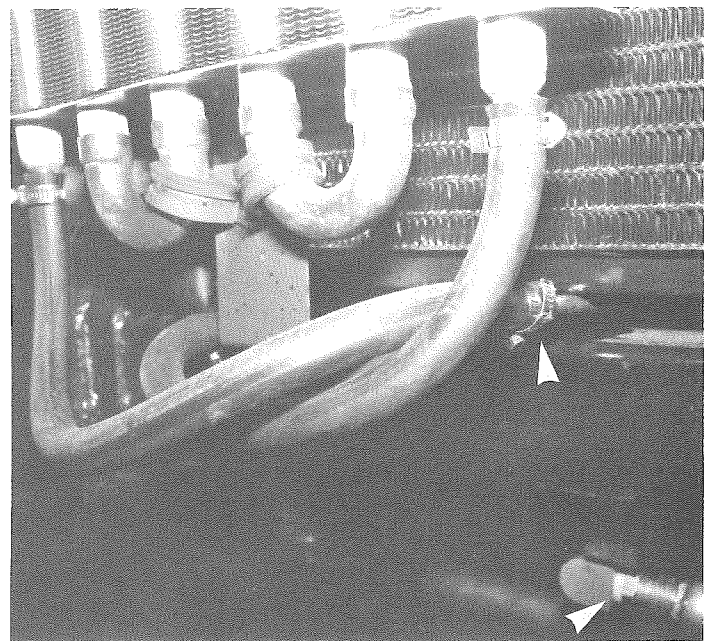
Transmission Shift Cable Removal: The transmission shift cable must be removed by disconnecting at the shift lever near the base of the bellhousing. Remove the 7/16" nut from the stud. Also, remove the 15/16" nut from the shift cable support bracket; the cable should remove easily. Speedometer Cable Removal: Remove the speedometer cable by unscrewing the 1"-diameter thumb nut. The cable is located at the extreme rear of the transmission near the transfer case. Oil Pressure Sending Unit: Disconnect the oil pressure sending unit by removing the wire from the terminal. The sending unit is located at the lower left side of the engine.
